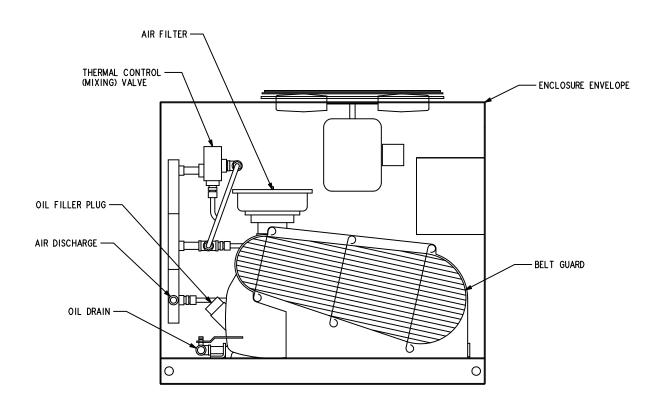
PACKAGE - BELT GUARD SIDE
